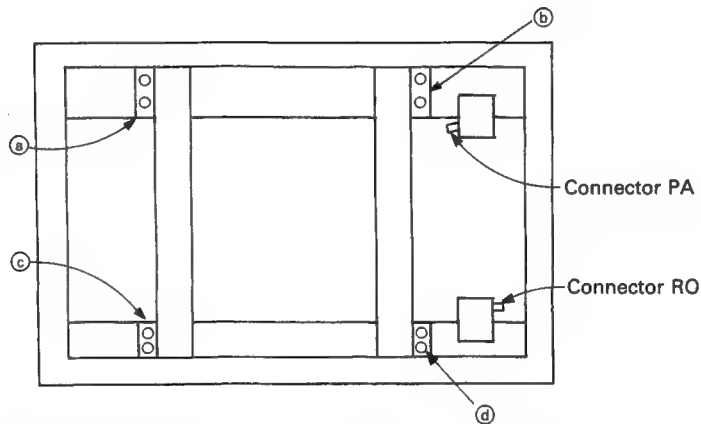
Rotational Mechanism Unit with Rear Cover Removed
